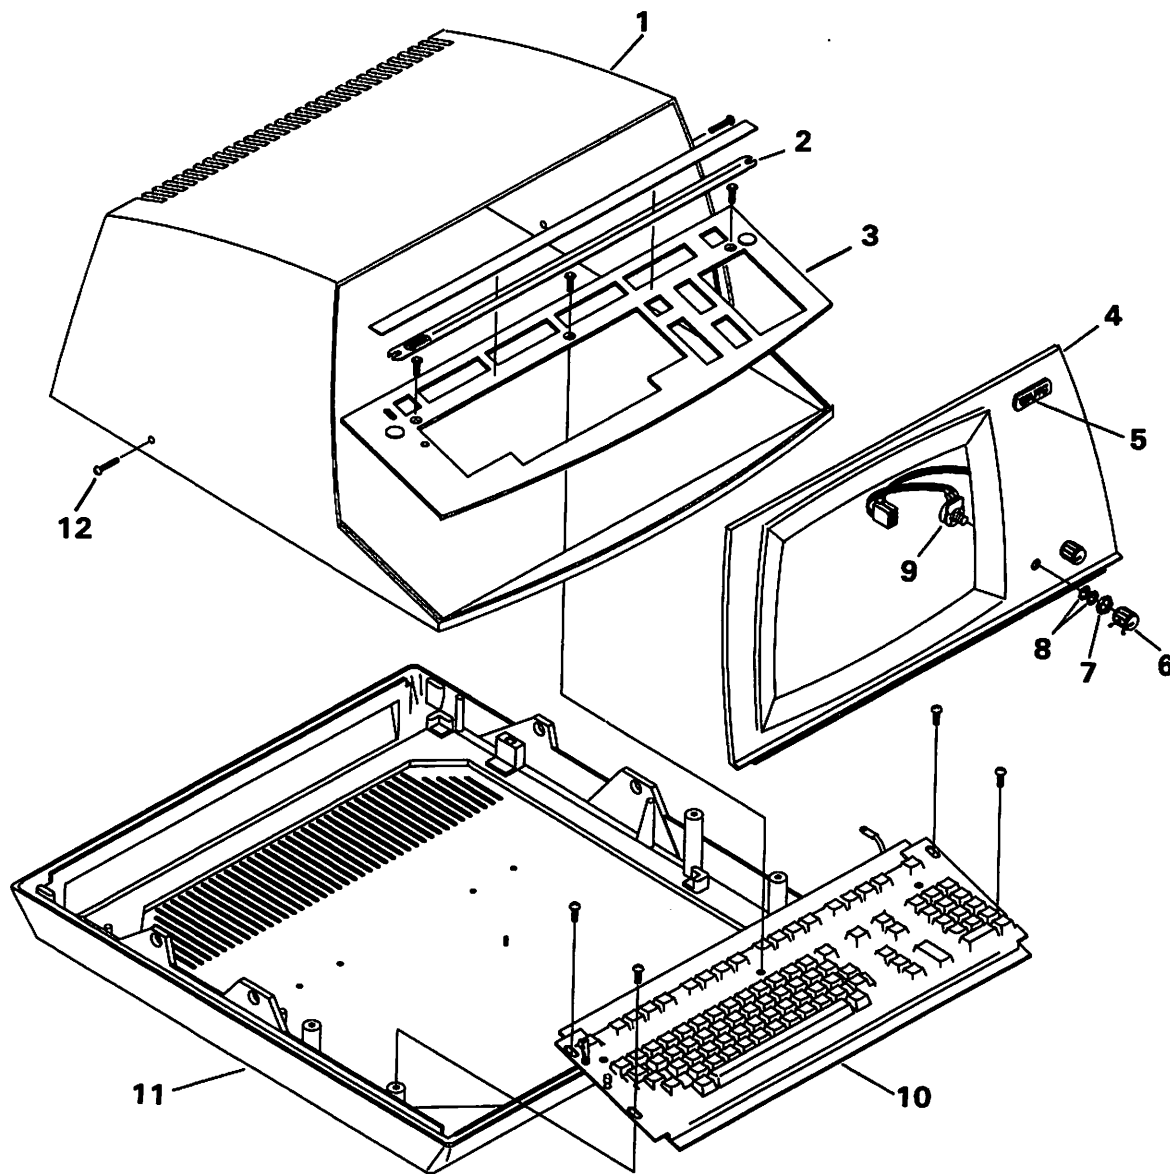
FRONTISPIECE (ASSEMBLY PART NO. 177-3236DE)
